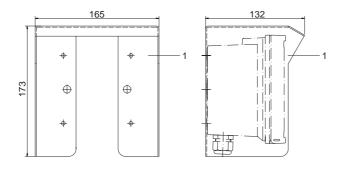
ZU 0276 protective hood for wall and pipe mounting
